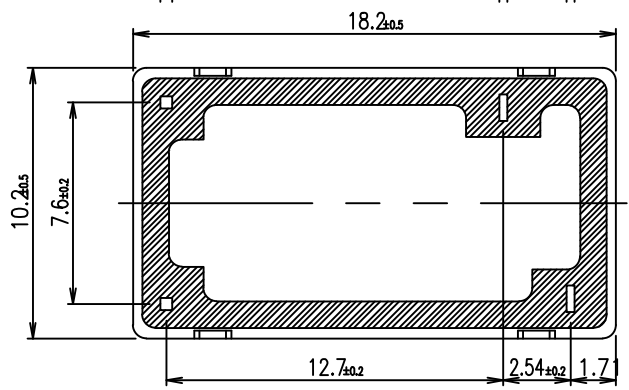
FIGURE FOR PRINTED CIRCUIT BOARD PROCESSING (BOTTOM VIEW)
